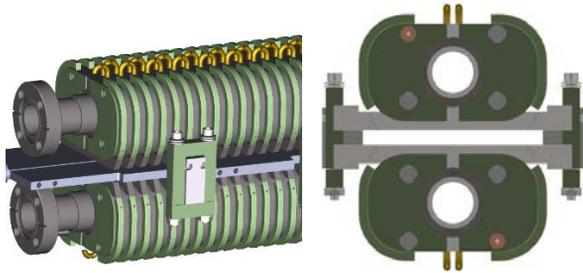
Assembly of two cores with precise spacers defining the magnetic gap.
